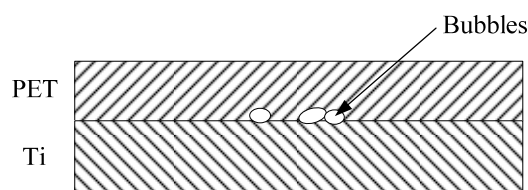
A schematic diagram showing a longitudinal section of a joint.
